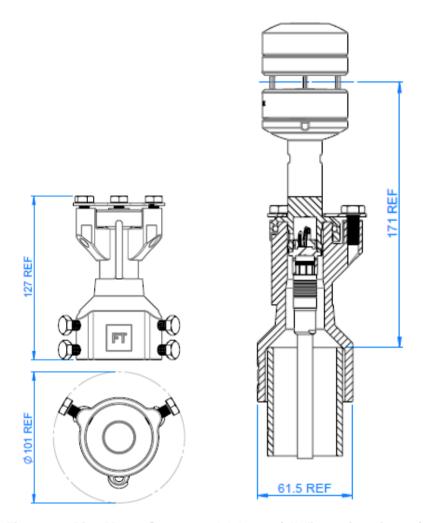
Pipe Mount Sensor and Adapter (all dimensions in mm)
